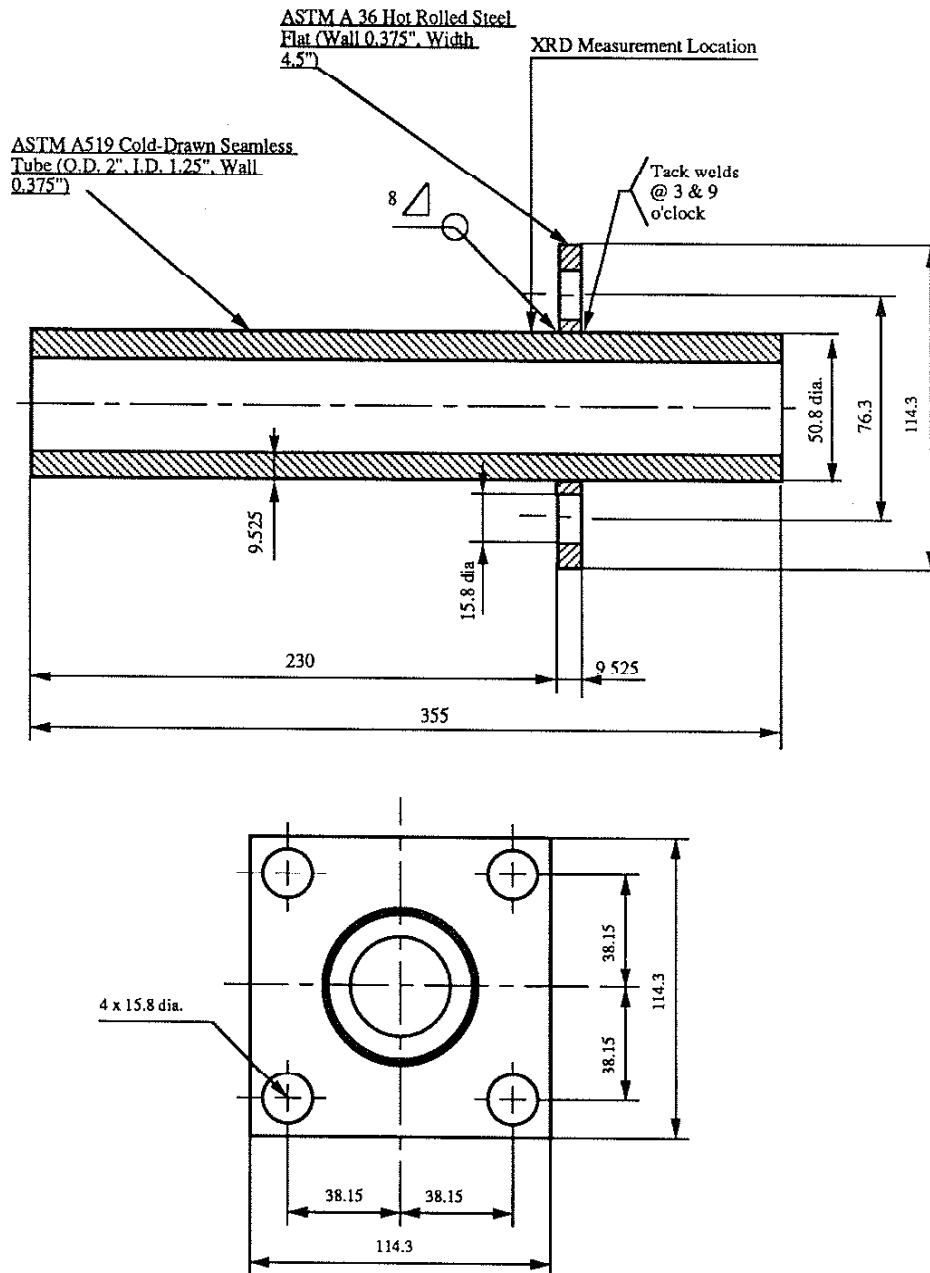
The dimensions of the tube-to-plate welded specimen.
